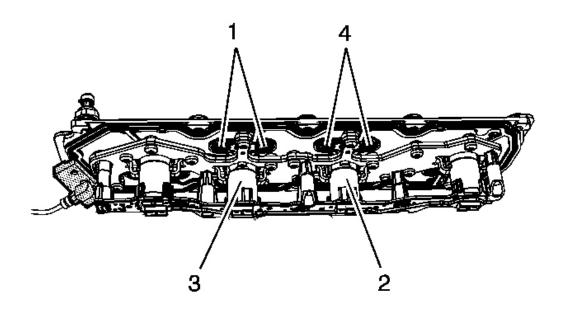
View Of Solenoid/Valves 2 & 3 Courtesy of GENERAL MOTORS CORP.
